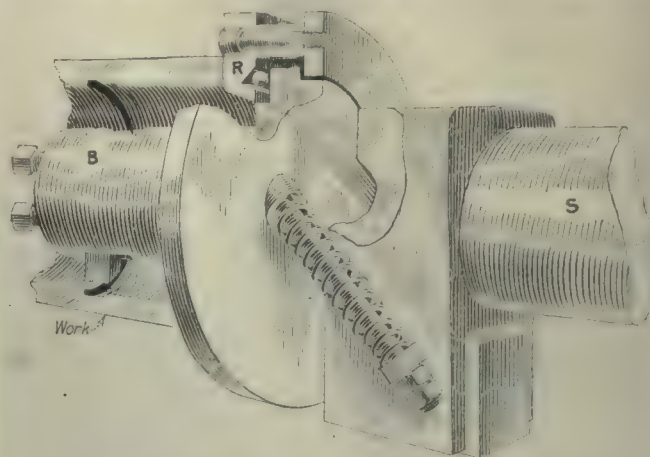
ATTACHMENT FOR CUTTING THE RECESS
